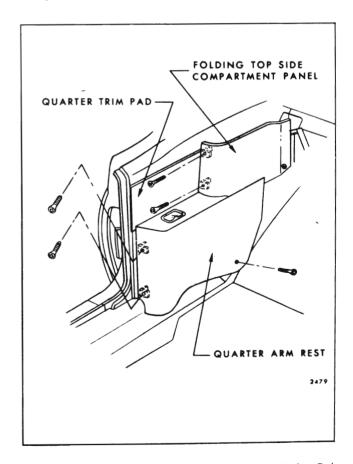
Quarter Trim Assembly - "F-67" Styles Only
